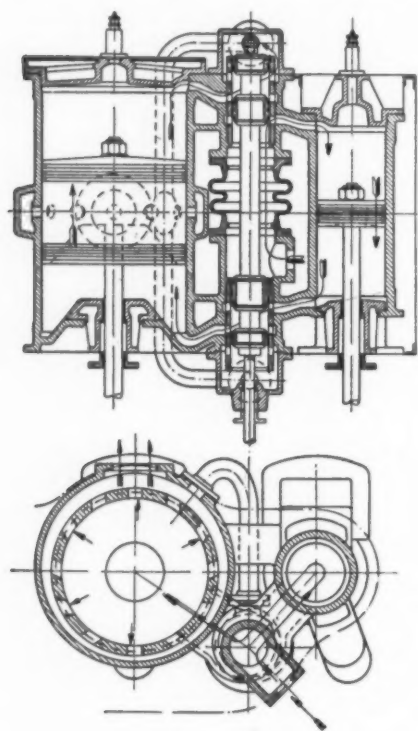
VALVES OF THE DOUBLE COMPOUND MARINE STEAM ENGINE
